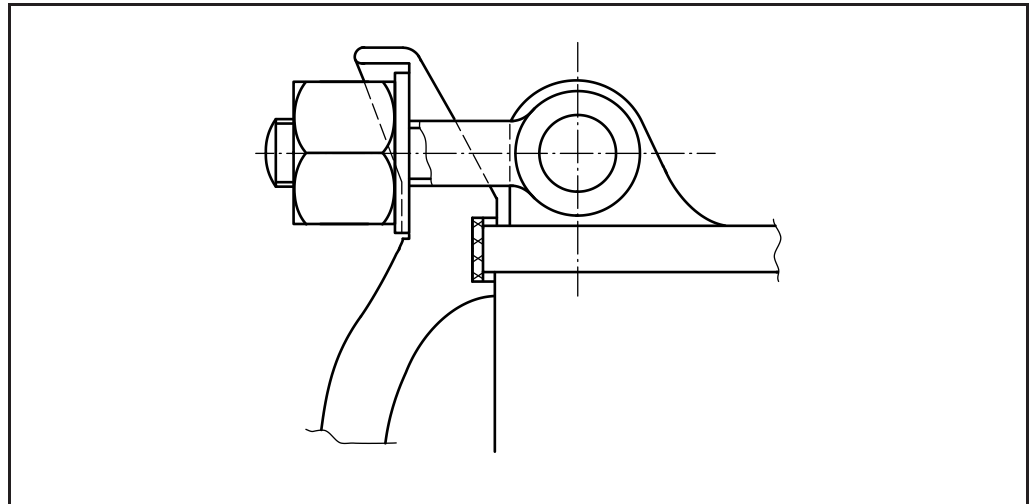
Typical lip arrangement for swing bolted flange
